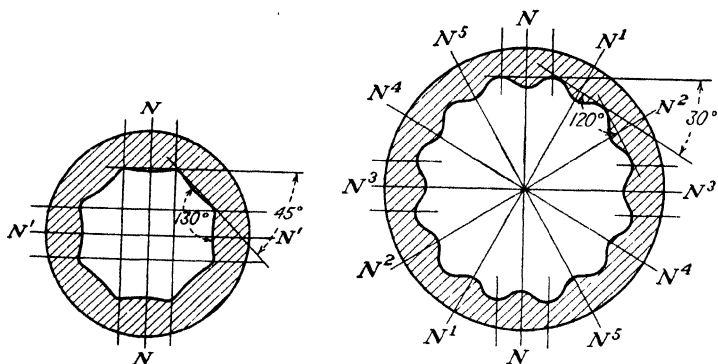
VII.—Examples of cross sections of round corrugated molds. (Courtesy of The Gathmann Engineering Co.)
